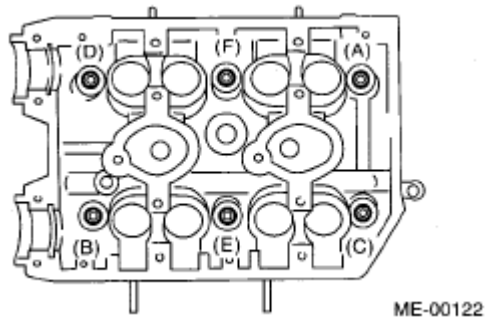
Identifying Cylinder Head Bolts Removing Sequence
